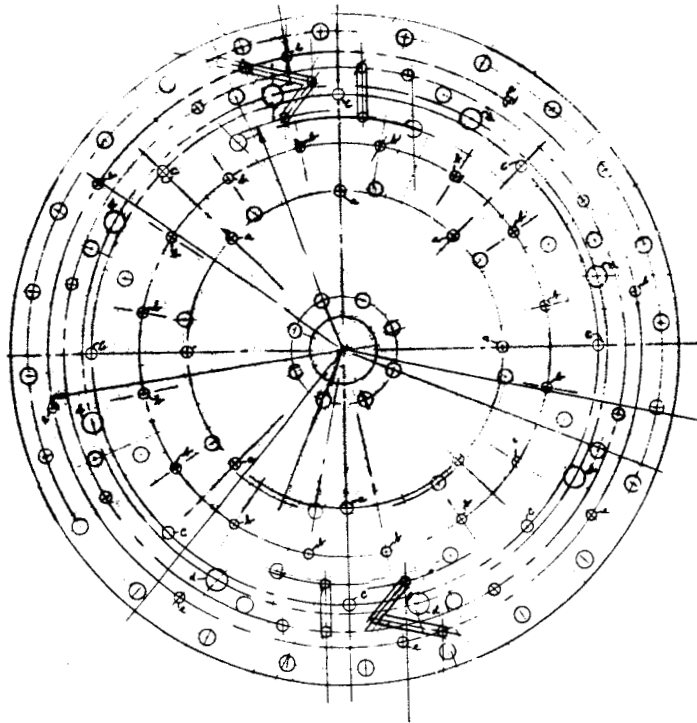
(a) TEST TRANSFER PLATE, NPX-104-64, BOTTOM
